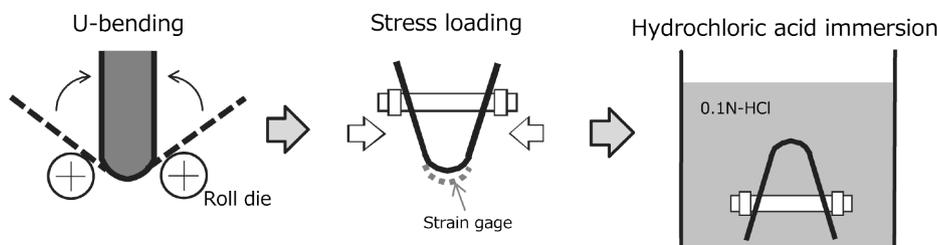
Delayed fracture evaluation method using U-bending test pieces
